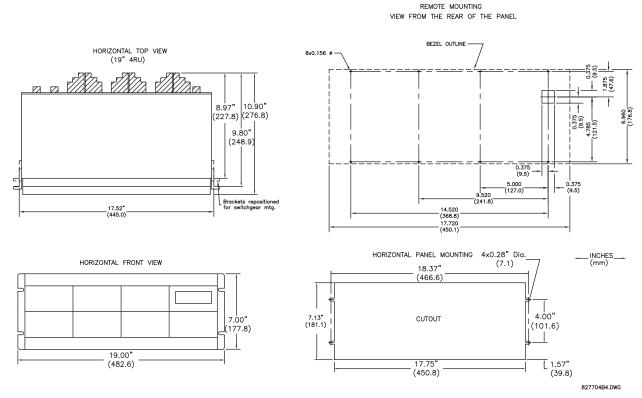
F60 HORIZONTAL MOUNTING AND DIMENSIONS
